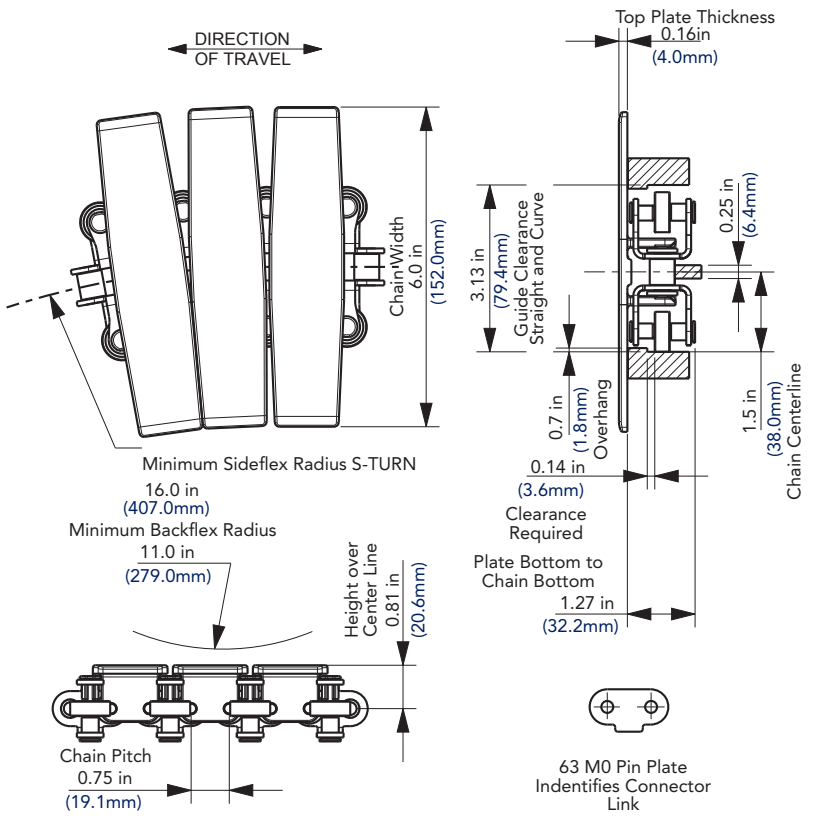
SpiralTop (Double-bearing) TableTop Chain with top plates molded in High Performance (HP) material on HiPro Carbon Steel base chain.
